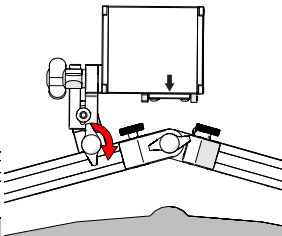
Tighten bar clamp knob when alignment is achieved
